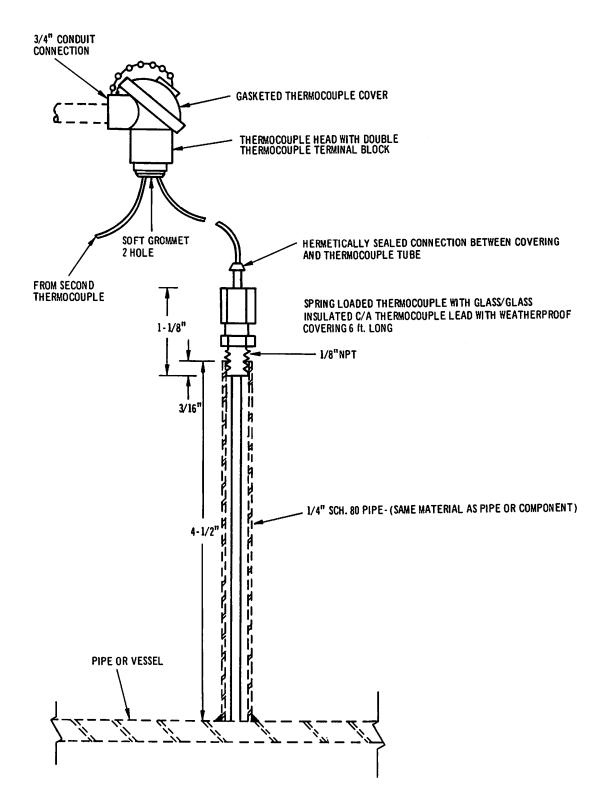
Figure 6.9-3 Pipe Surface Thermocouple Mounting [Vol. II, Chapter 6, p.6.9-6]
